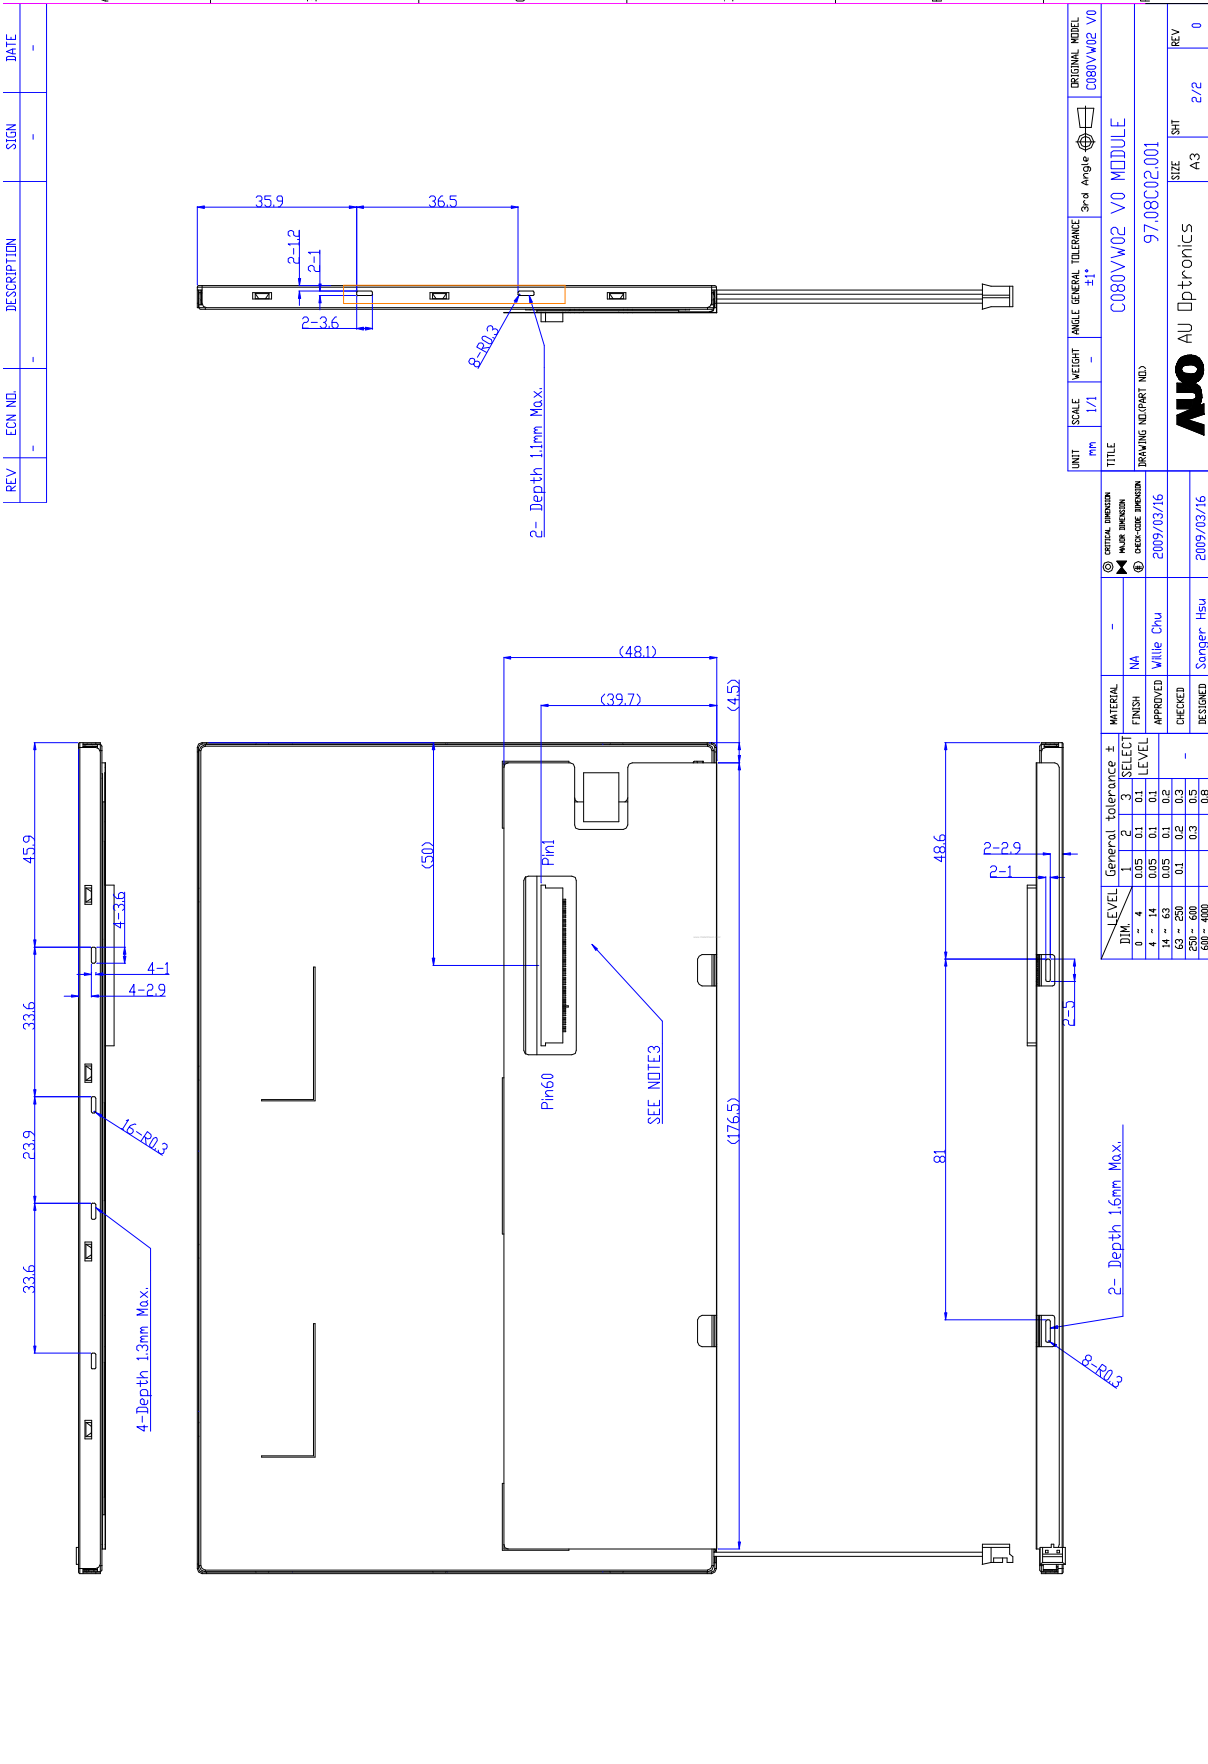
b Outline dimension of TFT-LCD module (Rear View)
